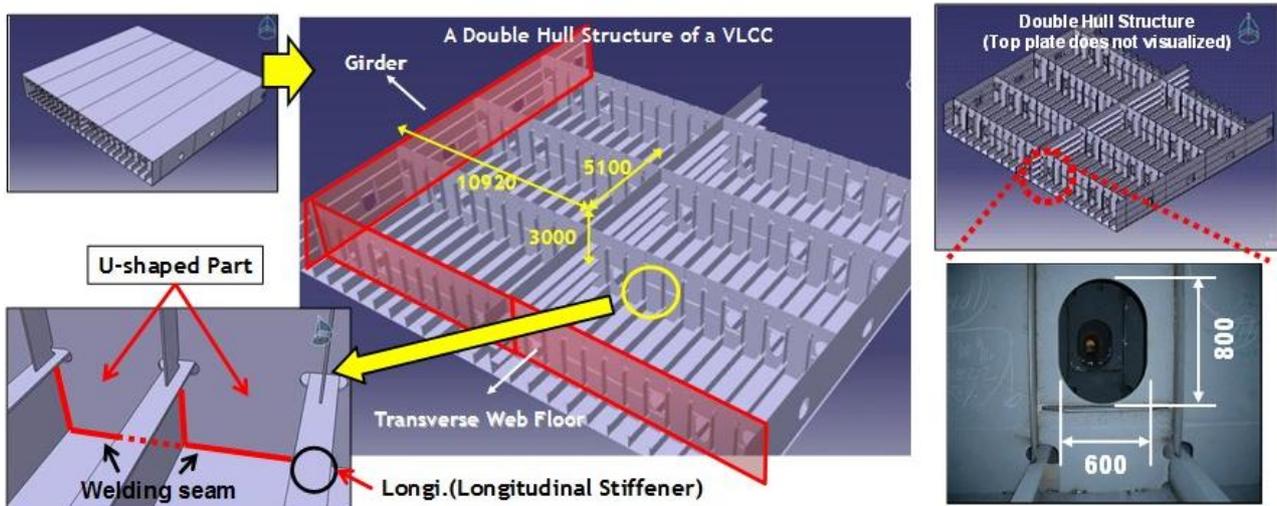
Welding target in a double hull structure and access hole on the transverse web floor in a double hull structure.
